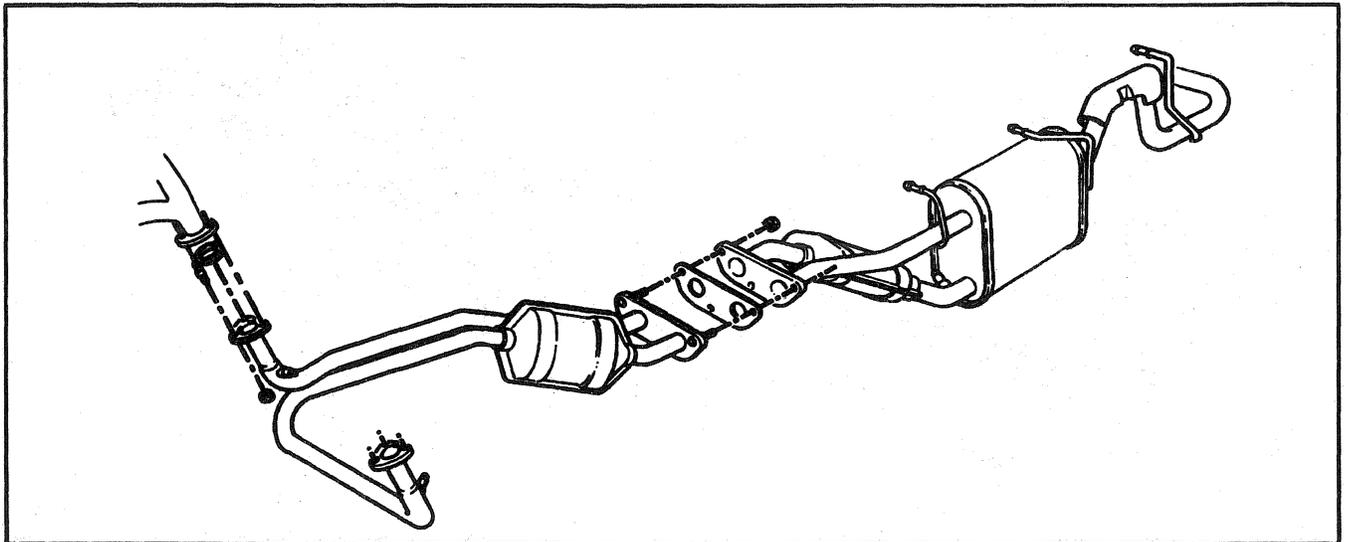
Exhaust System - C 310 Cab Chassis w/7.4L Engine over 15,000 GVW
